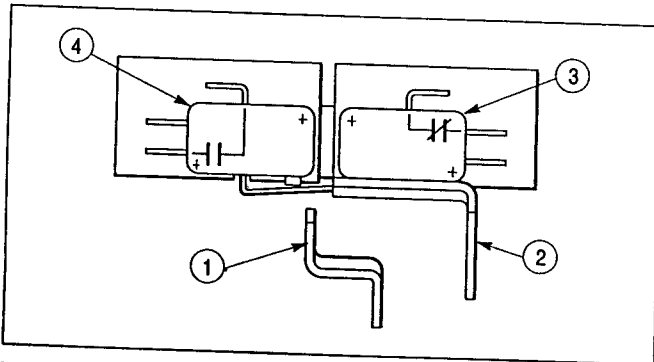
Position 2. Springs charging; motor not yet cutoff.
